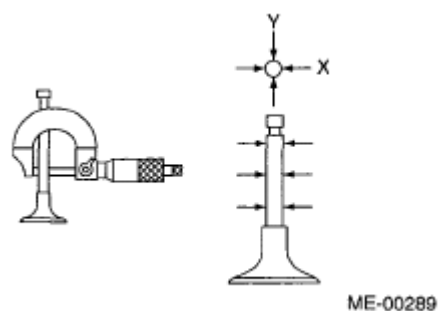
Checking Outer Diameter Of Valve Stem With Micrometer
